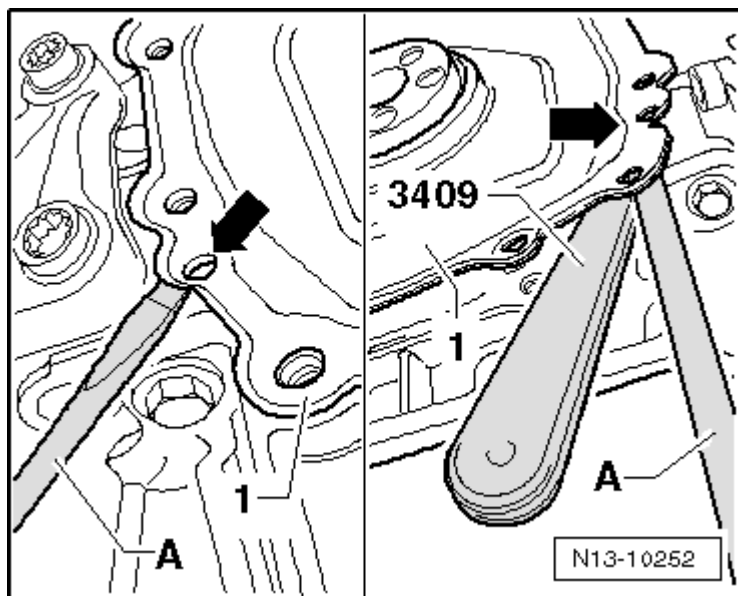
Pressing Off Sealing Flange Using Suitable Screwdriver
